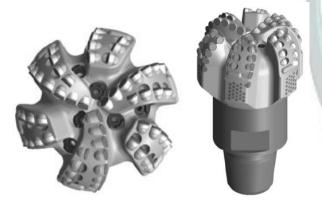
Durable 6 blades 16 mm Cutter Design for Deeper Main Zone Wells
